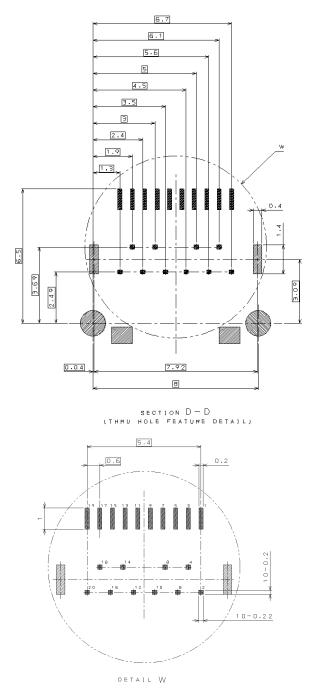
Recommended Mini DisplayPort Connector PCB Contacts and Mounting
